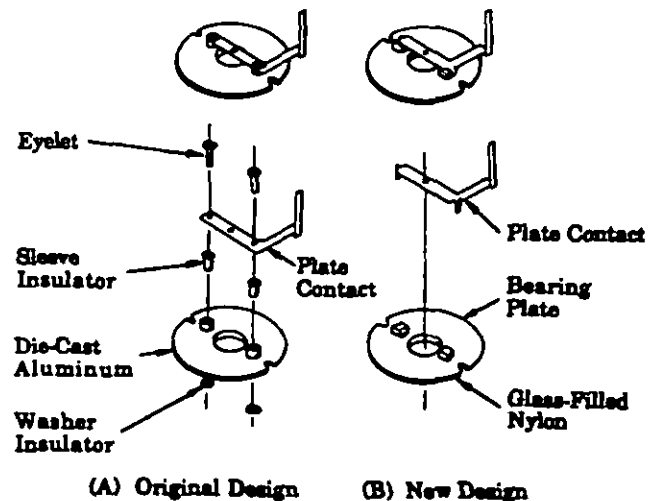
MK 1 Fuzing System, Bearing, and Contact Plate Assembly (Ref. 9)
